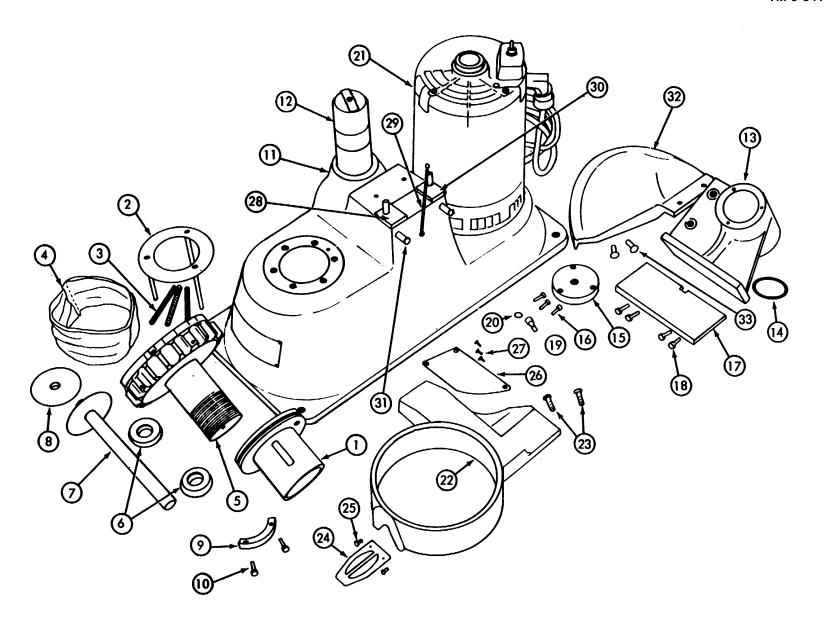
CRG-750 Heavy Duty Cap & Rod Grinder
